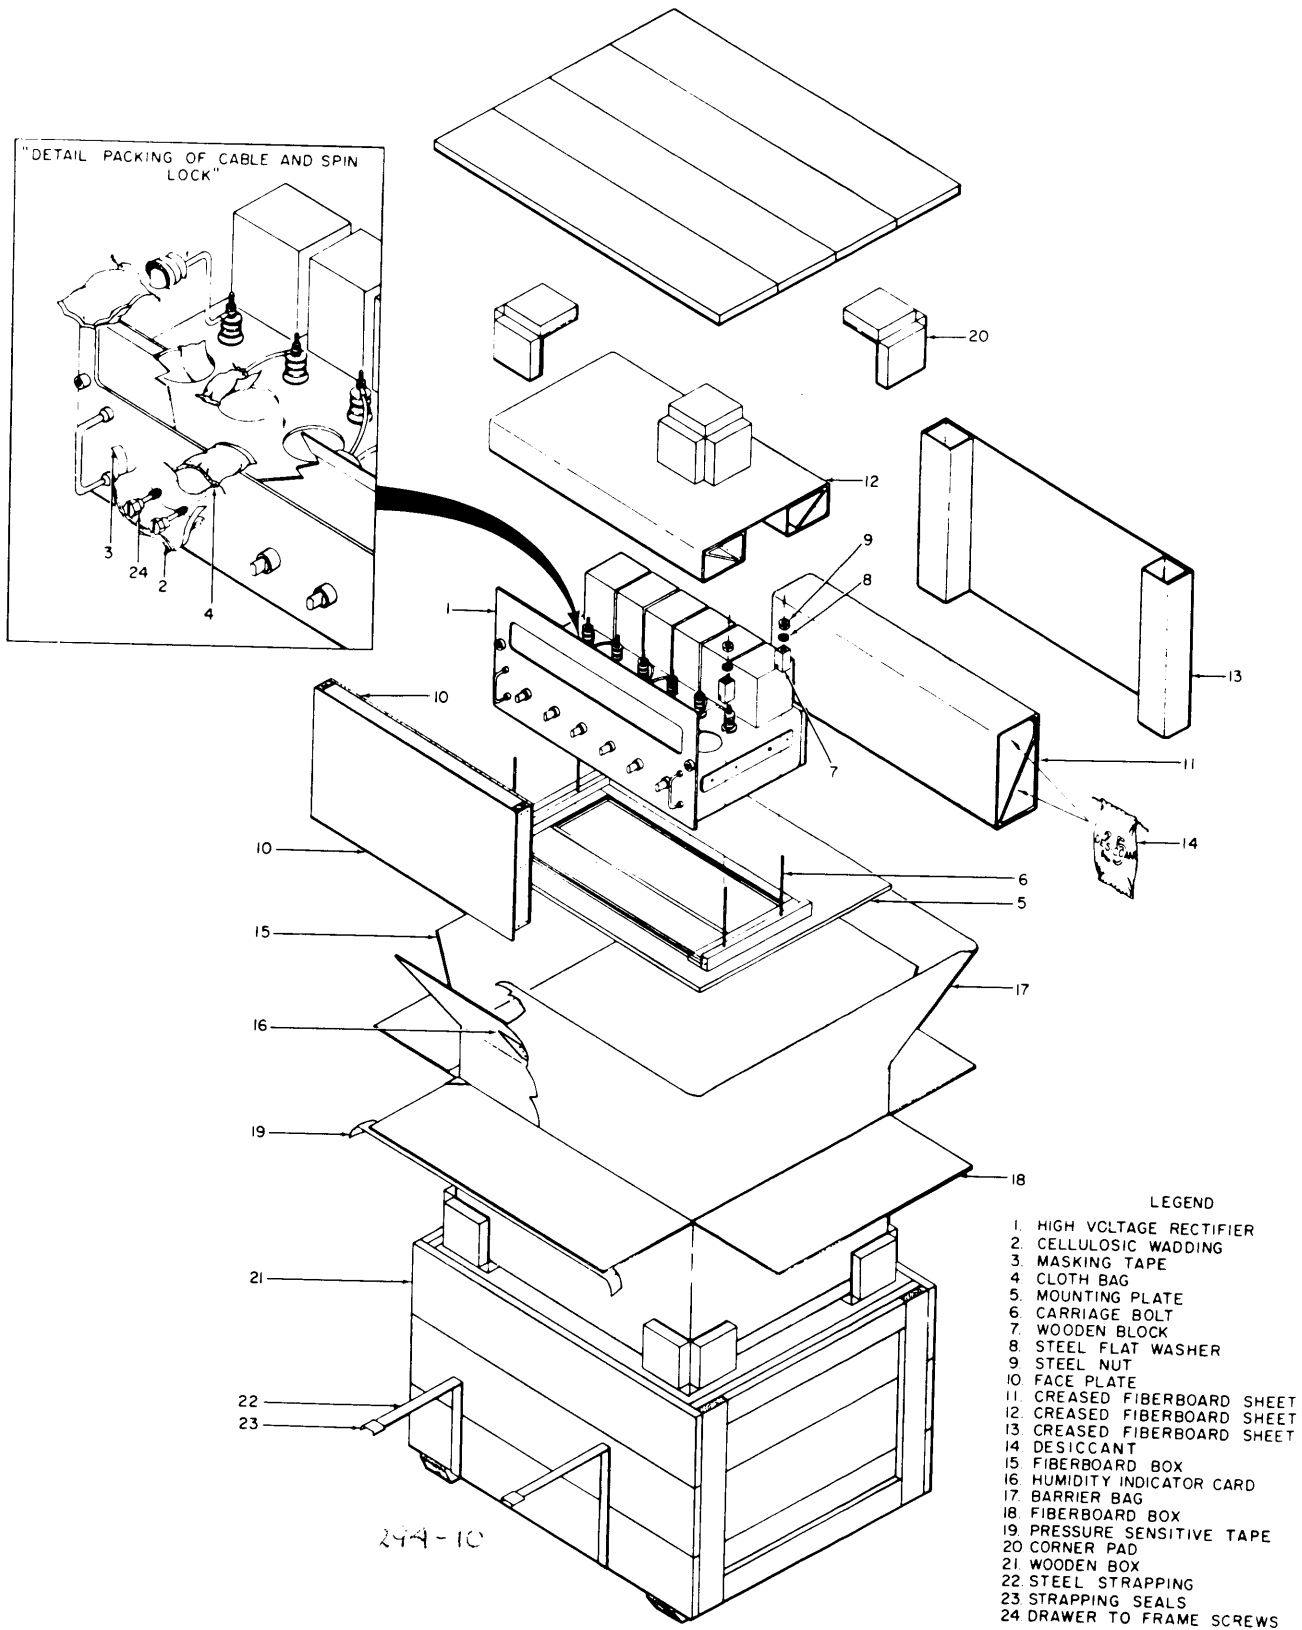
Typical Equipment Packaging (sheet 3 of 5)
